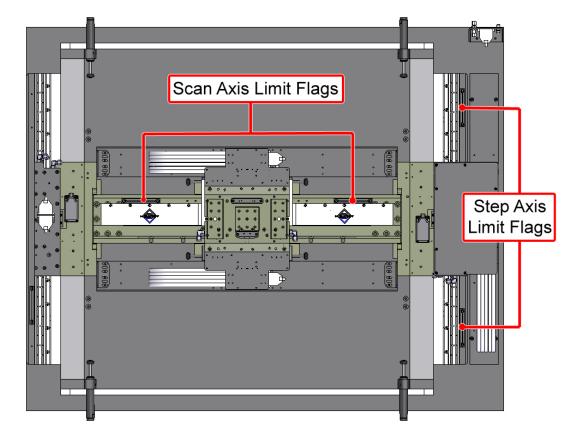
View of a Typical Planar HD Showing Limit Switches
